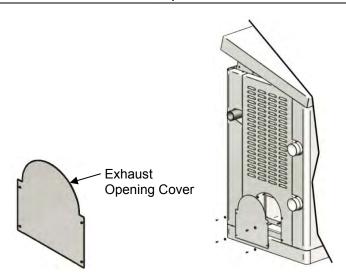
Rear Exhaust Kit (P/N 00364937) for Changing Exhaust Outlet from RIGHT HAND side to REAR
